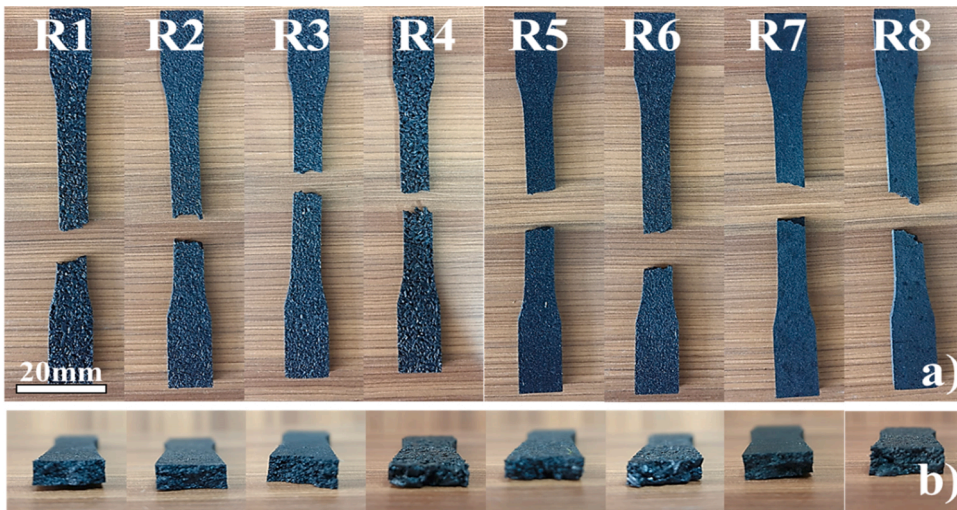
Fracture after tensile stress. a) Failed samples and b) cross-section of the samples.
